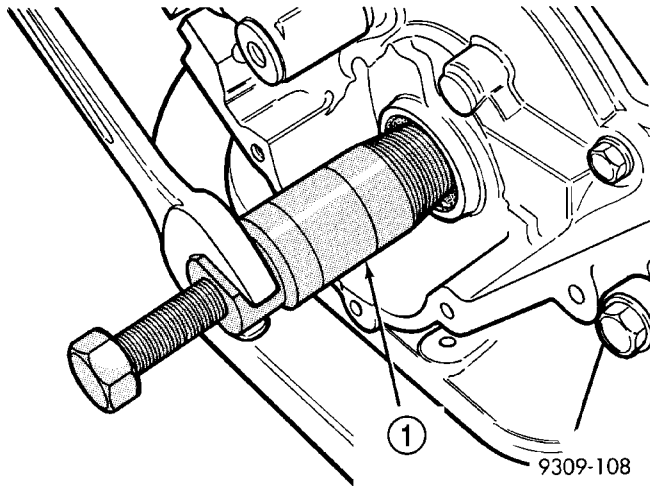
REMOVING CRANKSHAFT OIL SEAL WITH SPECIAL TOOL
